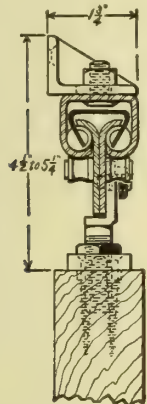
CROSS-SECTION 727-1 ELEVATOR DOOR HANGER
